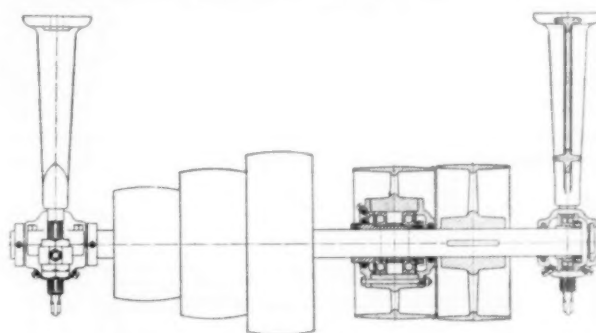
COUNTERSHAFT EQUIPPED WITH BALL BEARINGS
